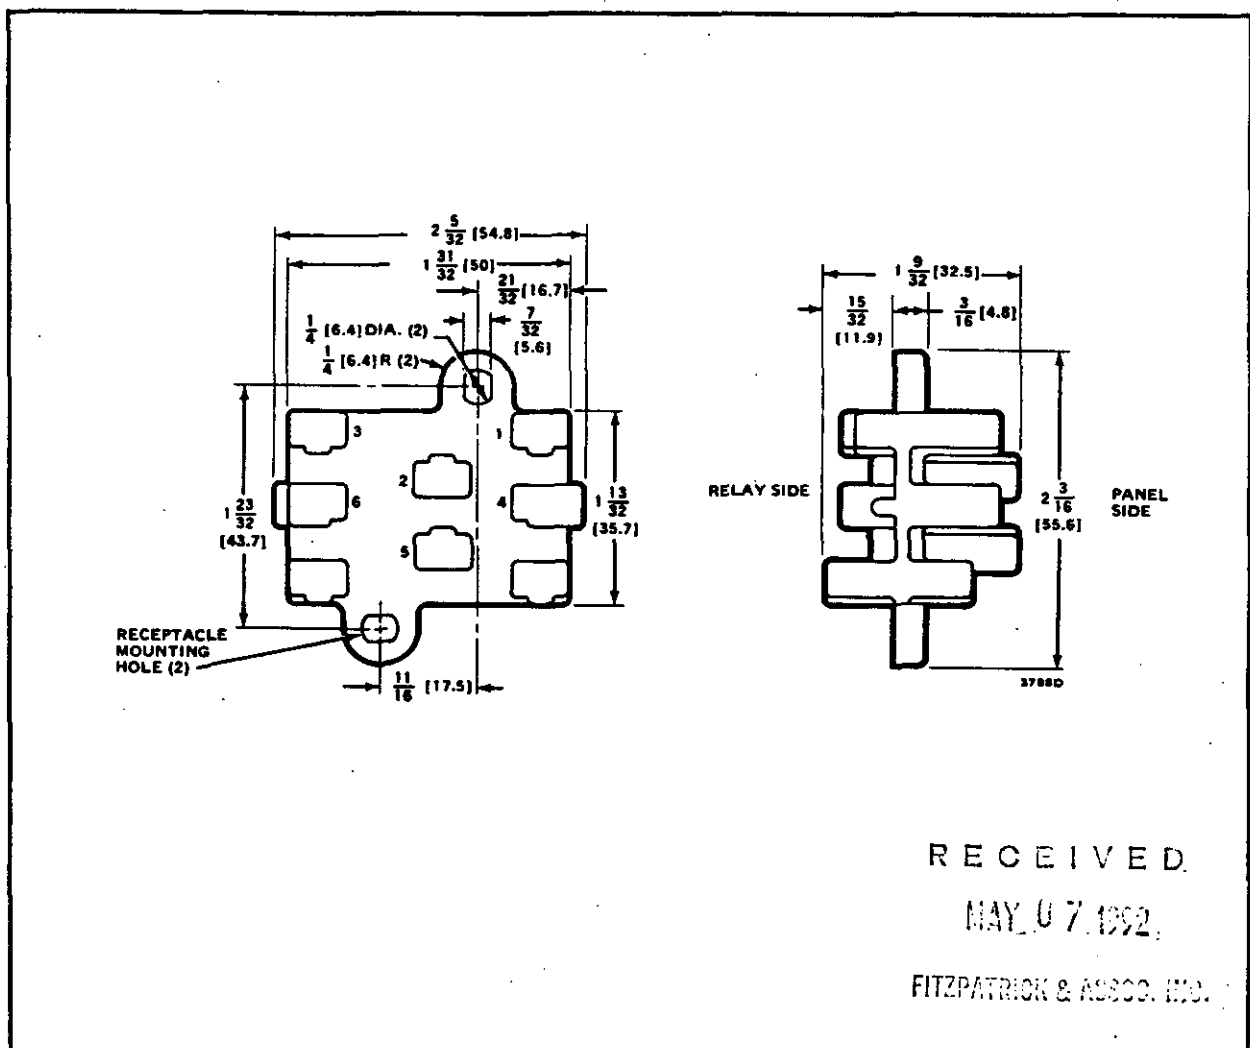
DIMENSIONS OF WIRING RECEPTACLE.
